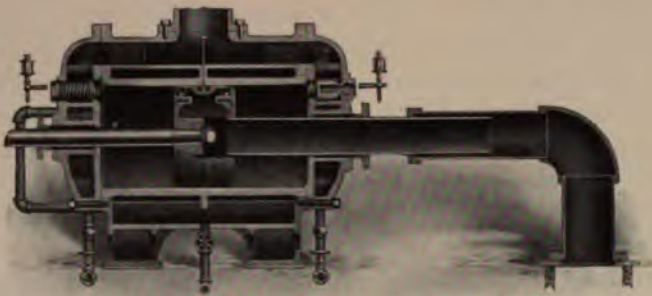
Piston Inlet Compressor. Ingersoll-Rand Co.
